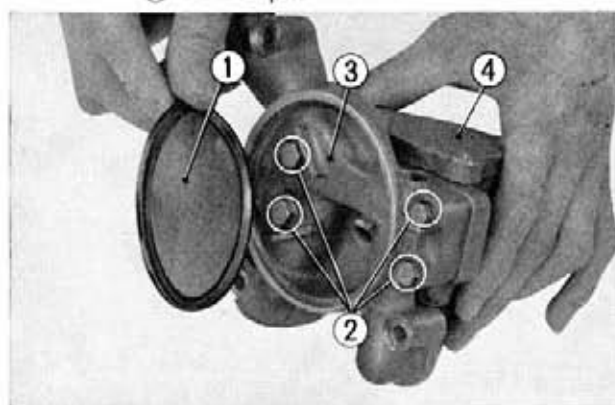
① Metal oil screen ③ Oil pump base
